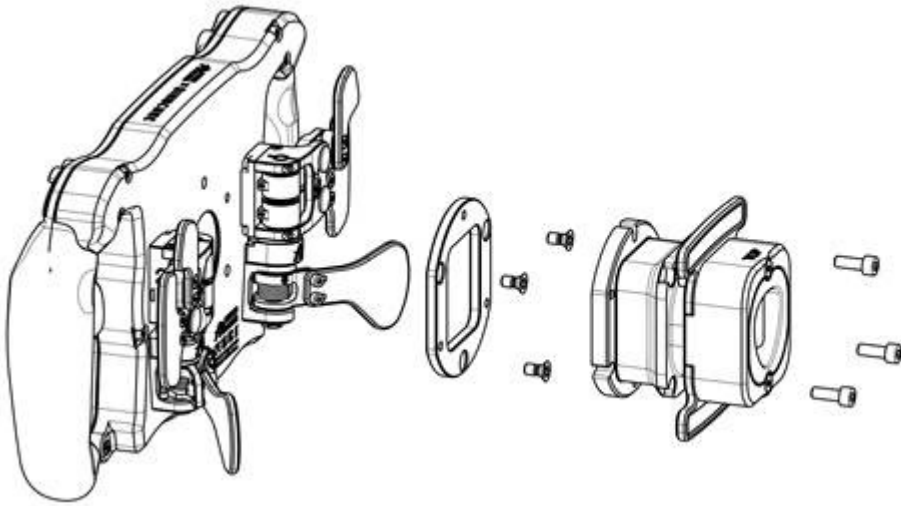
Mounting the SC3 SQR WHEEL SIDE – Ascher Racing QR Mounting Plate
